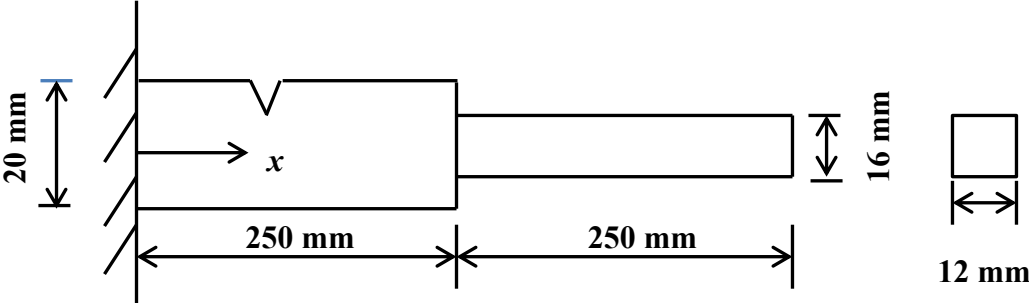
Sketch of single step cantilever beam of rectangular cross-section
